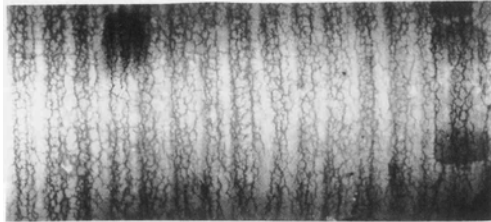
Typical thermal fatigue cracks commonly observed in the welding beads of used continuous caster guide roll materials made by overlay welding process.
